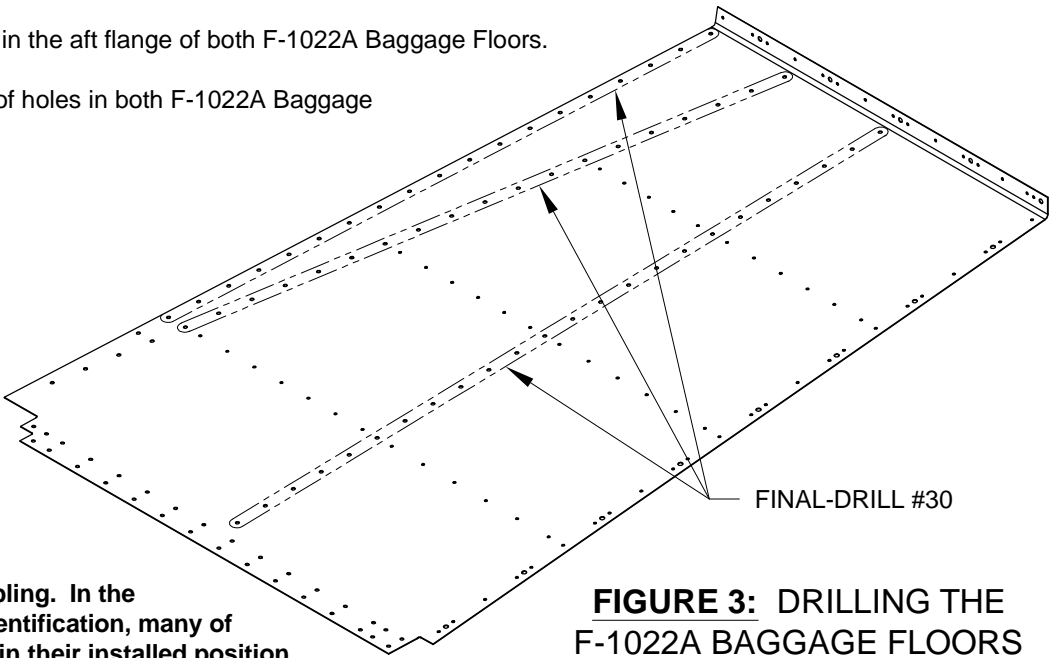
DRILLING THE F-1022A BAGGAGE FLOORS
